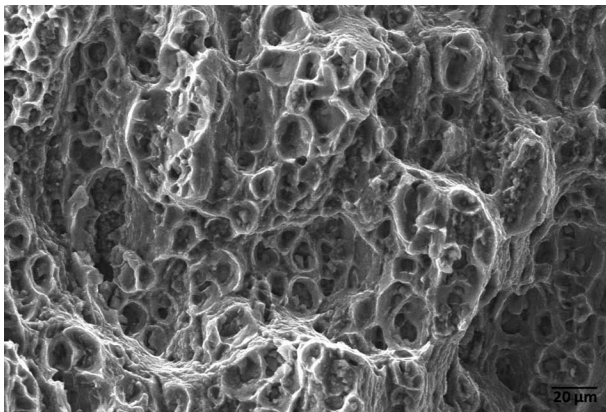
High magnified image of fracture surface shown in Fig. 225
